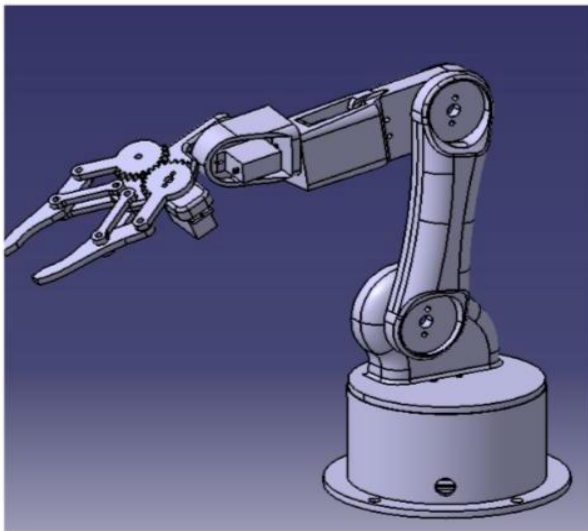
Robotic Arm CAD Model Developed in SolidWorks
